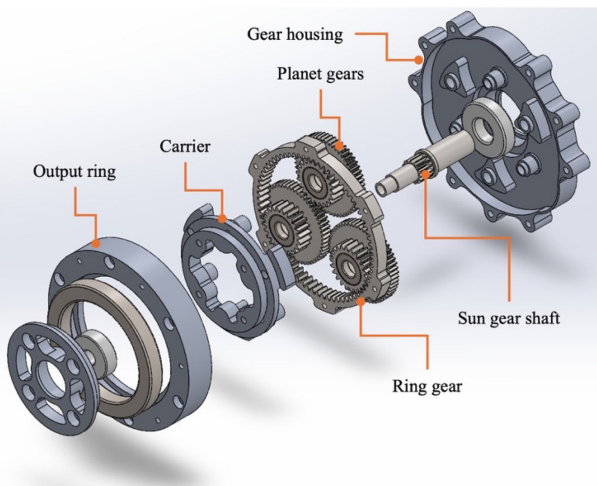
A disassembly of a stepped planetary gear module. The input is a sun gear shaft, and the output is an output ring connected to a ring gear
